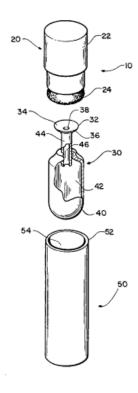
U.S Patent 5941583 A 'Contact Lens Insertion and Manipulation Assembly and Method'
